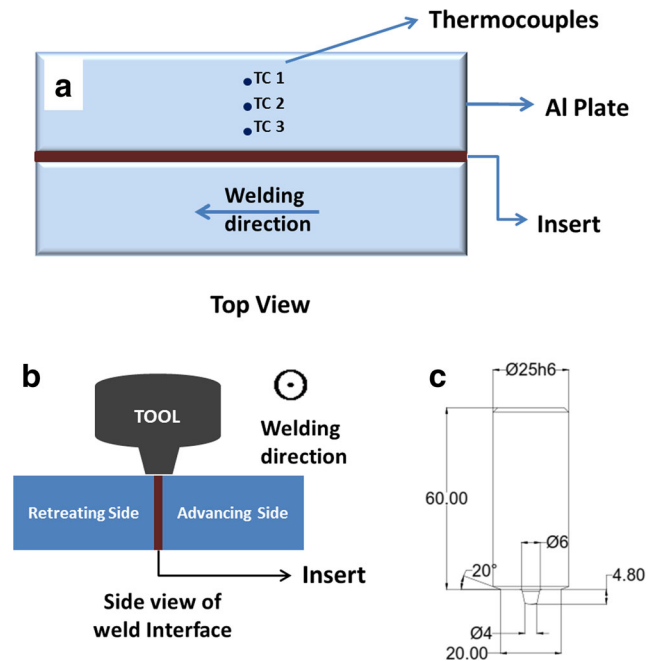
Schematics of the insert and thermocouples location in the weld (a) top view (b) side view (c) schematic of FSW tool
